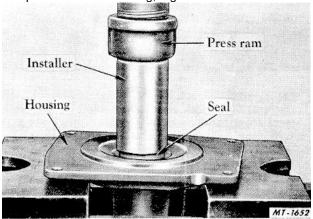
Using SE-1721 Installing Tool for Water Pump Seal Assembly
